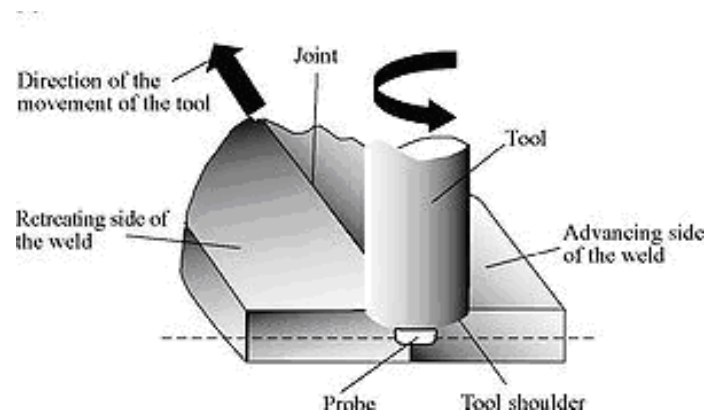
Schematic of Friction Stir Welding [4]
